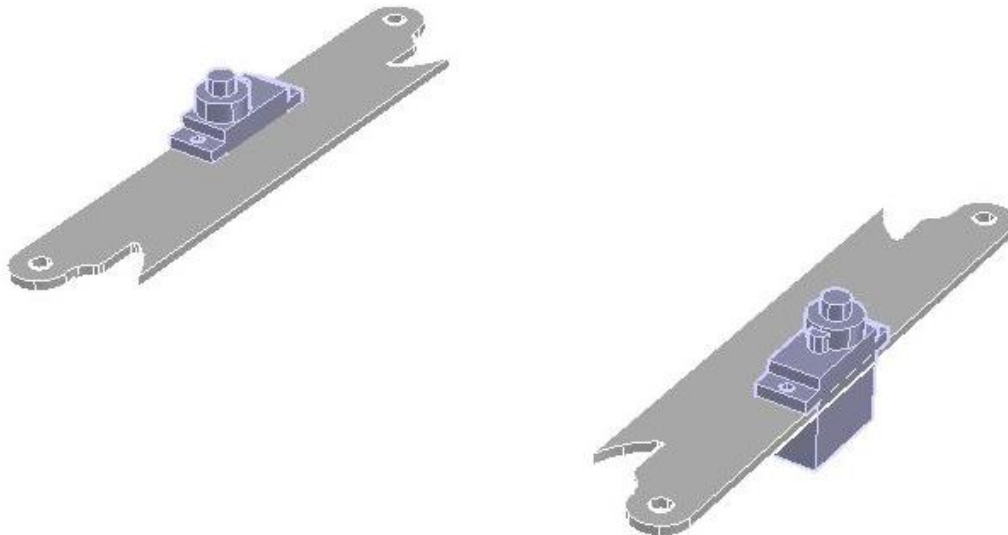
3D view of axles with servo motors for Steering movements
